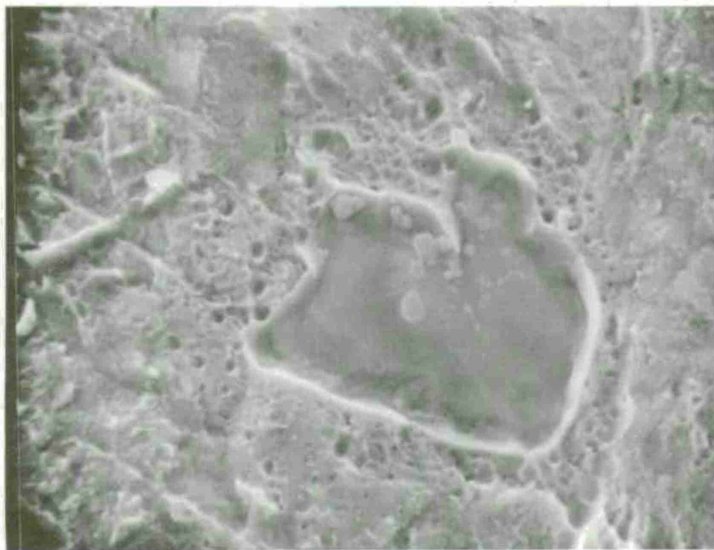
Tensile flat fracture surface from low-heat processing parameters.
